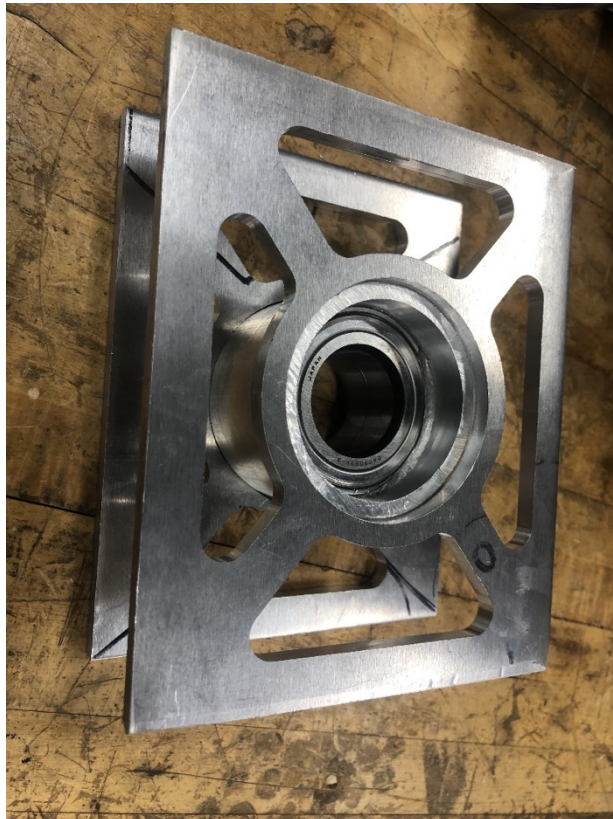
CV axle bearing pressed in sleeve and faceplates for trailing arms
